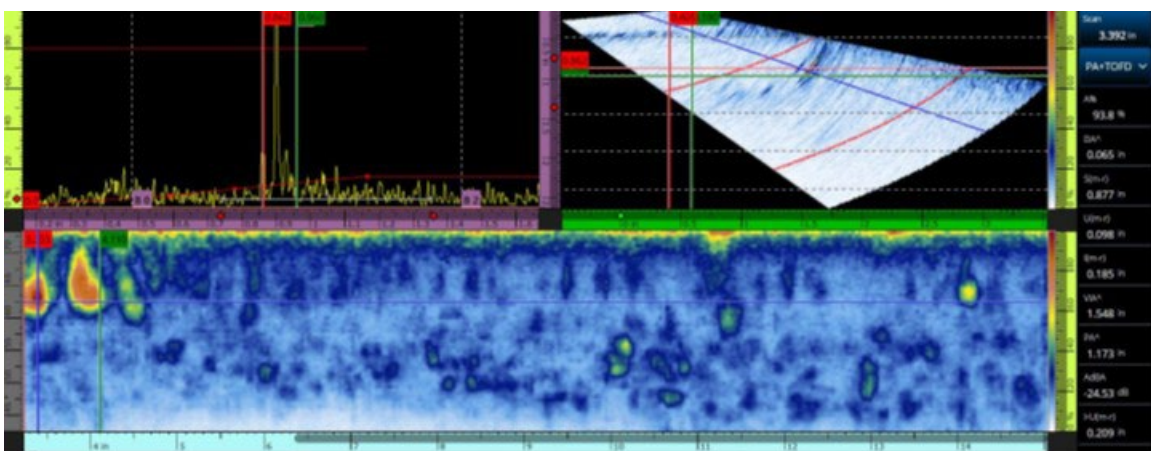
PAUT indication of defect at Location A in fillet weld test panel MGL-3 from OD-raster scan
